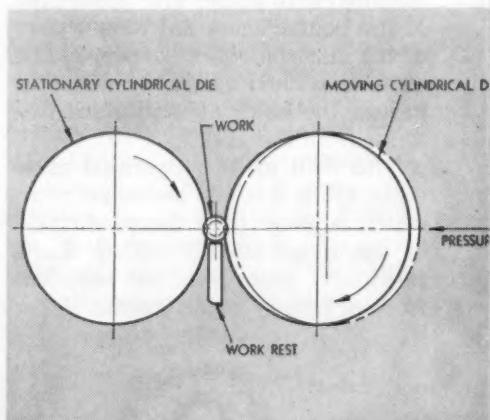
Two cylindrical-die machines have two opposed dies on parallel axes; blank to be rolled is supported on rest between dies.
